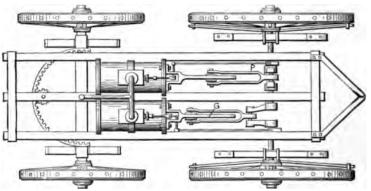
GURNEY'S STEAM CARRIAGE—PLAN.
